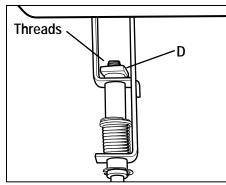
One or two threads on Forward Clutch Rod should show above nut.
